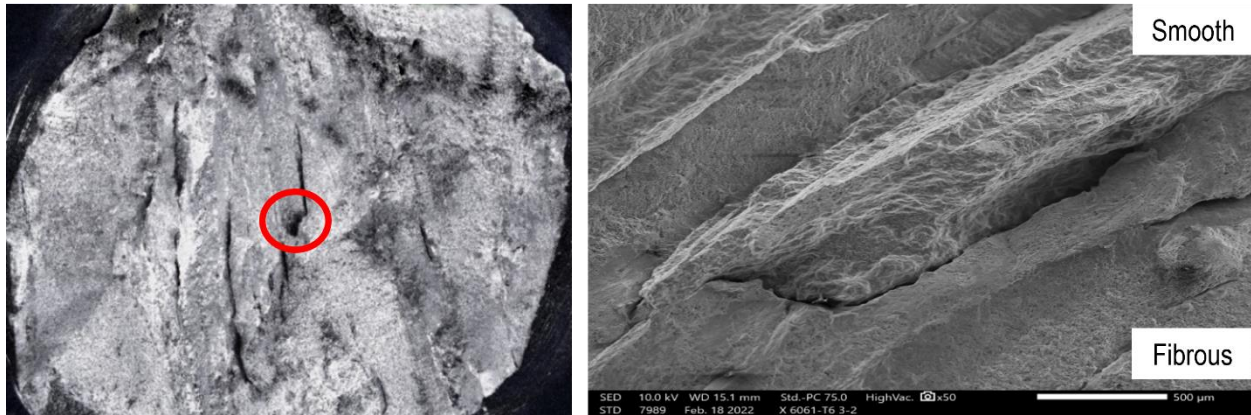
The appearance of the fracture surface changed from smooth to fibrous (right) near the secondary crack circled in red.
